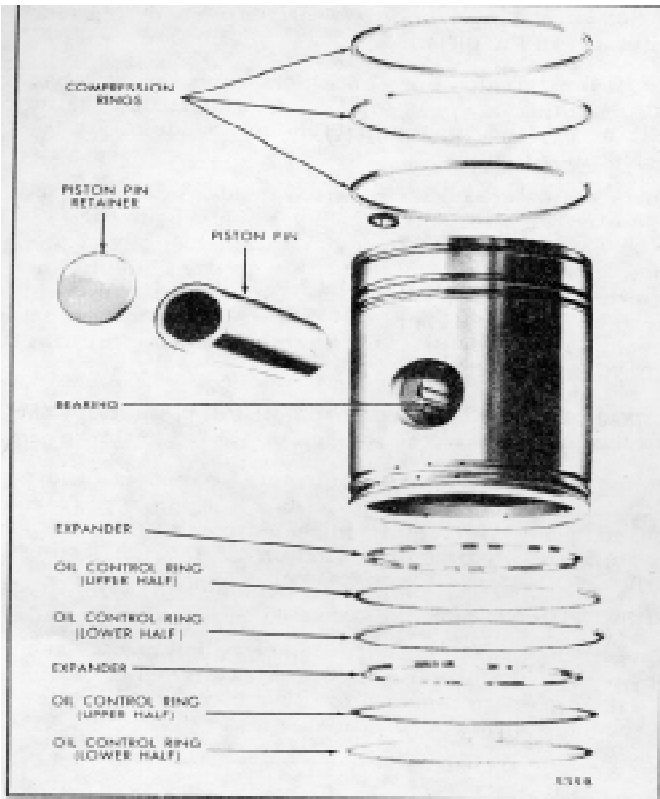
Piston Ring Location (Non-Turbocharged Engine)
